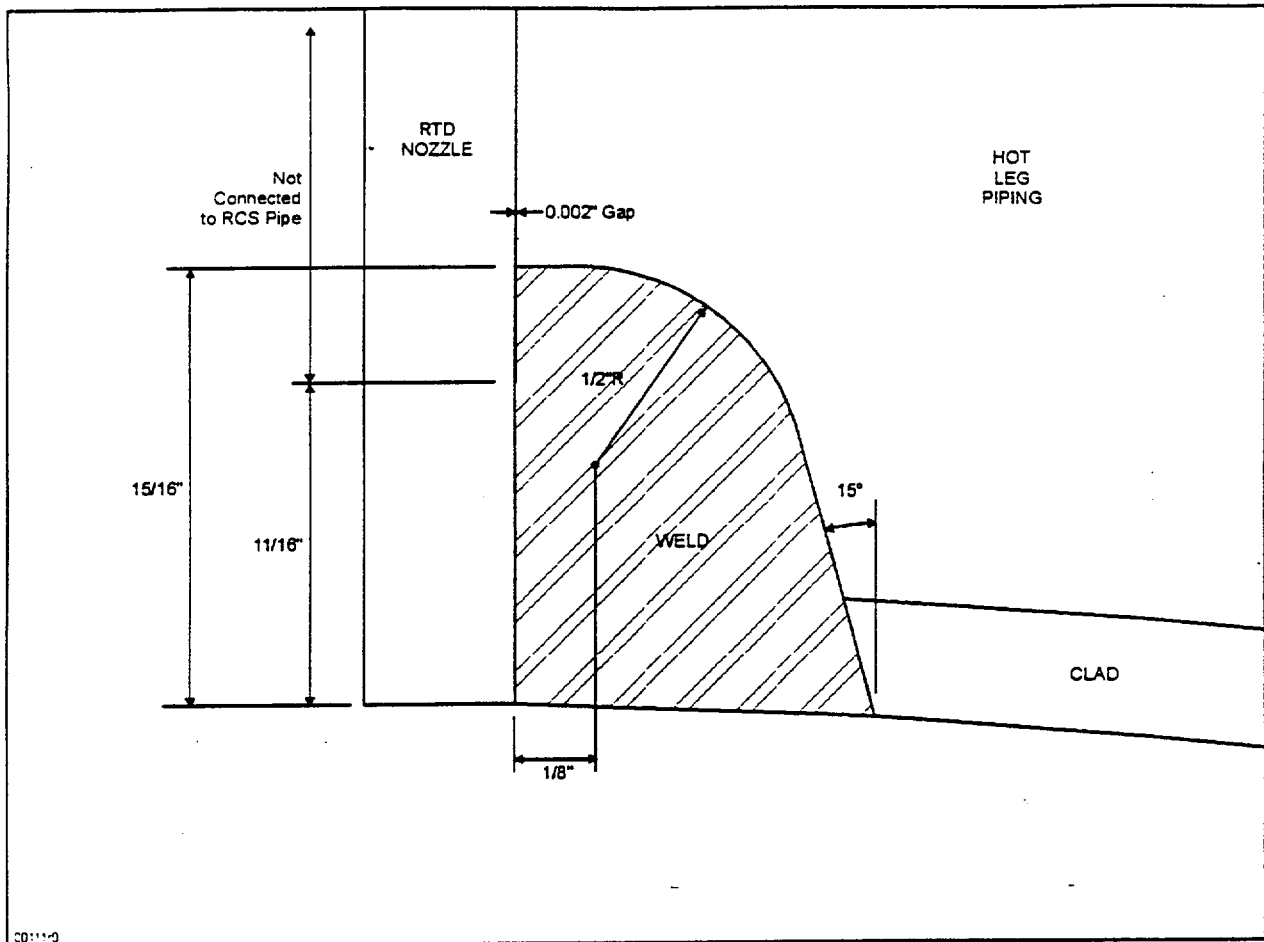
Geometry and Dimensions of Hot Leg Pipe RTD Nozzle Penetration, Existing Alloy 600 ID Weld
